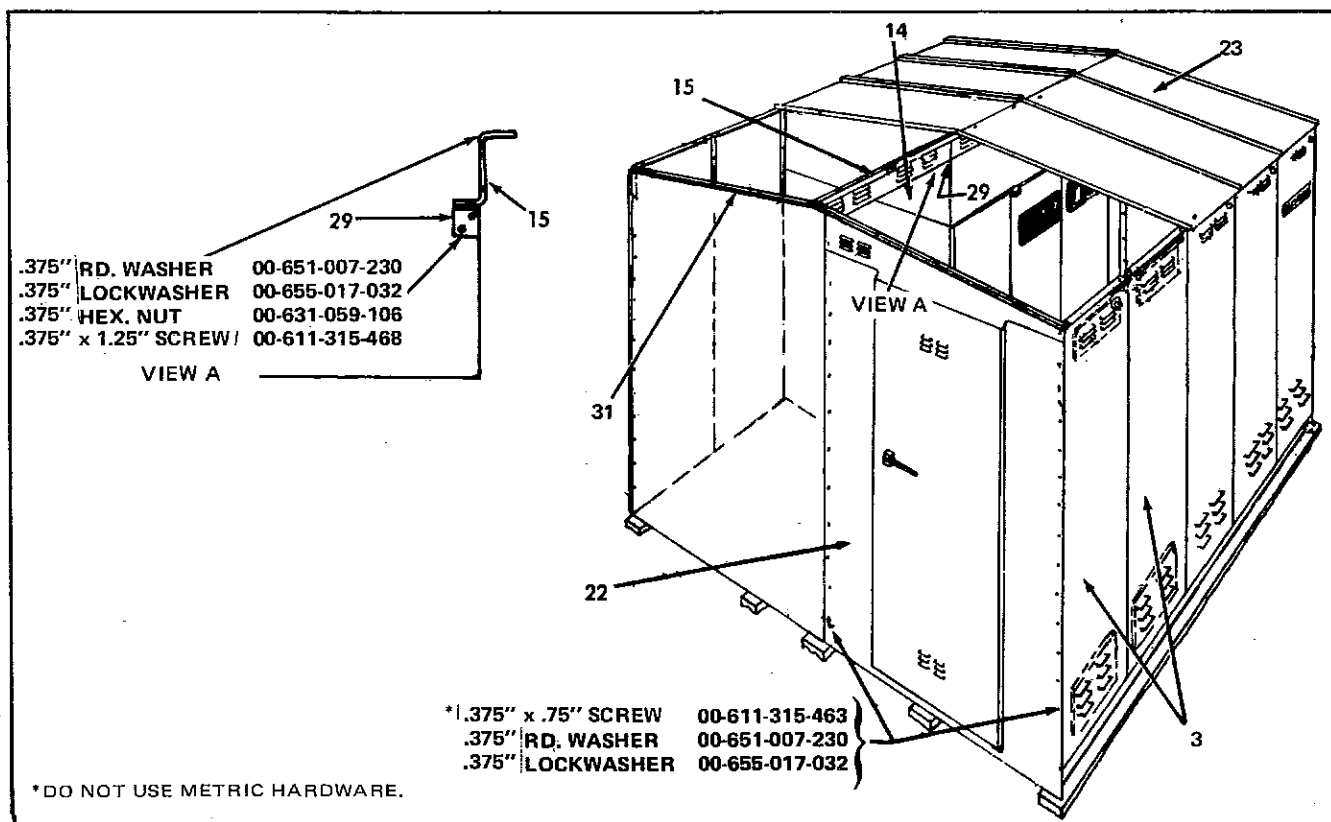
Door and Roof Support Installation (5 kV) – Single Aisle with Work Space
